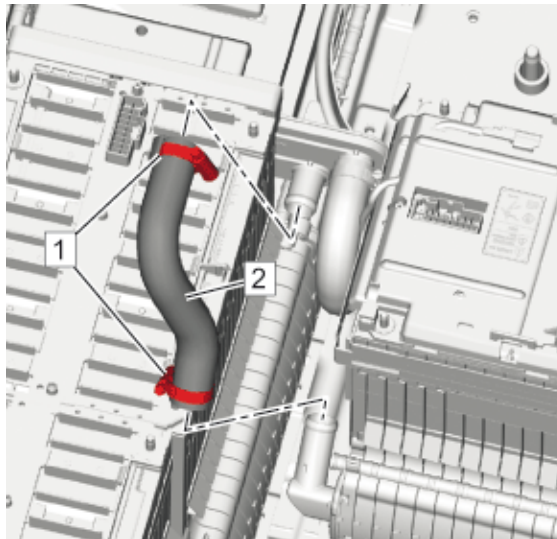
High Voltage Battery Cooling Manifold Inlet Hose And Clamps
